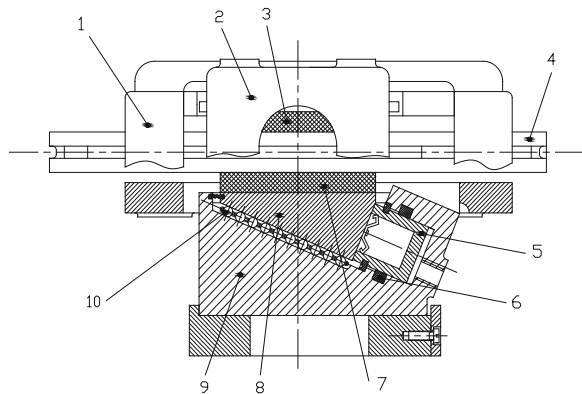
Specific structure of wedge disc brake. 1—brake caliper mounting bracket; 2—brake caliper; 3, 7—friction plate; 4—brake disc; 5—brake cylinder; 6—friction limit ring; 8—wedge block; 9—wedge mechanism; 10—rollers
